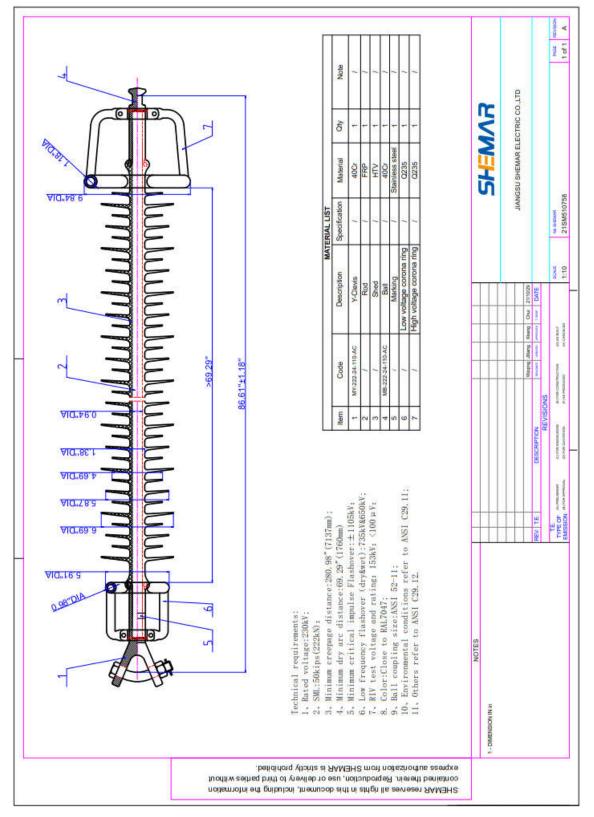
230 kV Composite insulator, SML 222 kN, drawing No. 21SM510758 Rev. A
